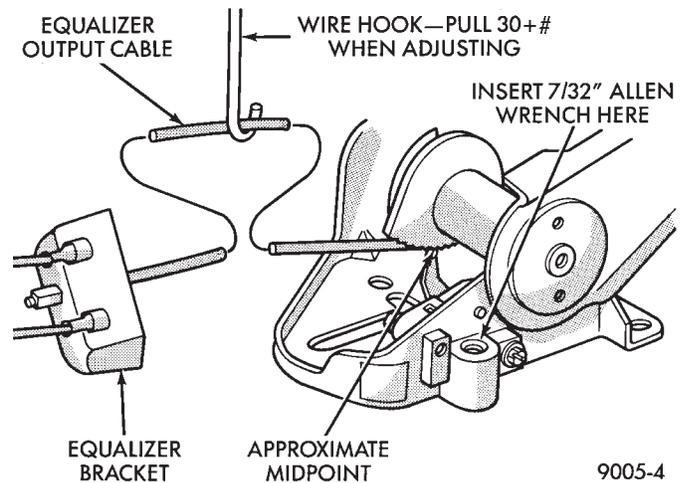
Self Adjusting Parking Brake Lever Assembly
